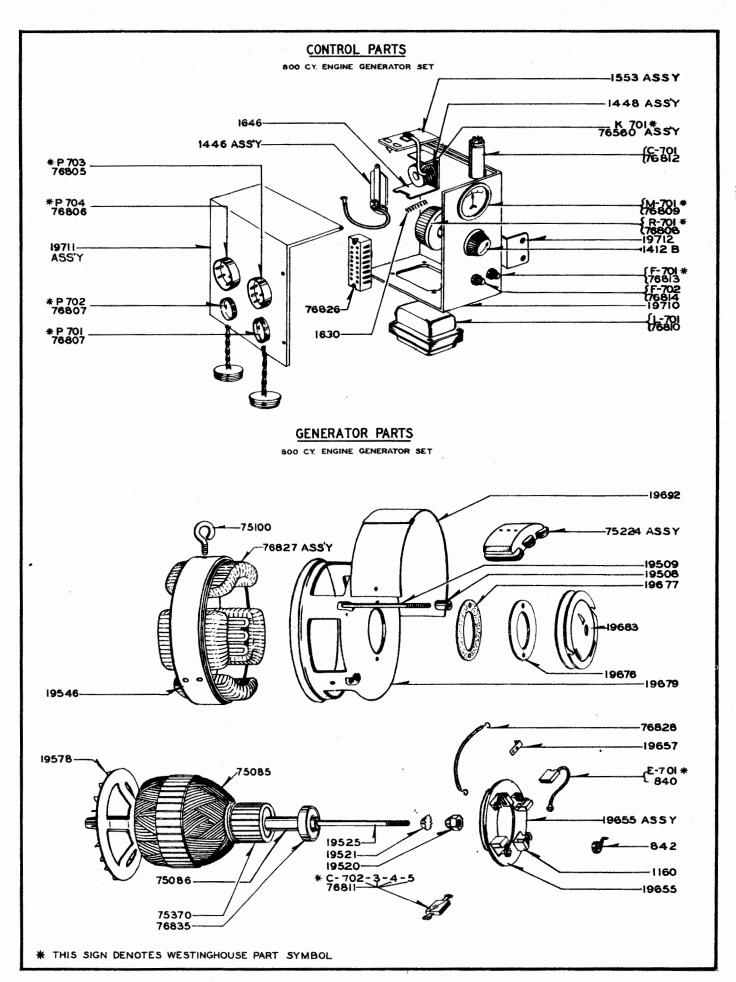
Control and Generator Parts for Generator Type CDO-21647, a Part of Engine Generator Type CDO-73004-A.
